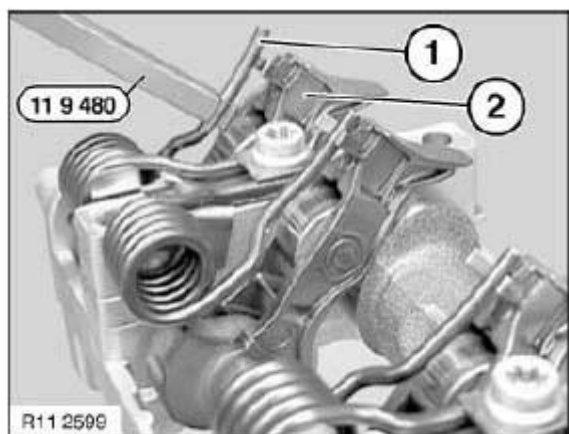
Identifying Intermediate Lever And Torsion Spring
